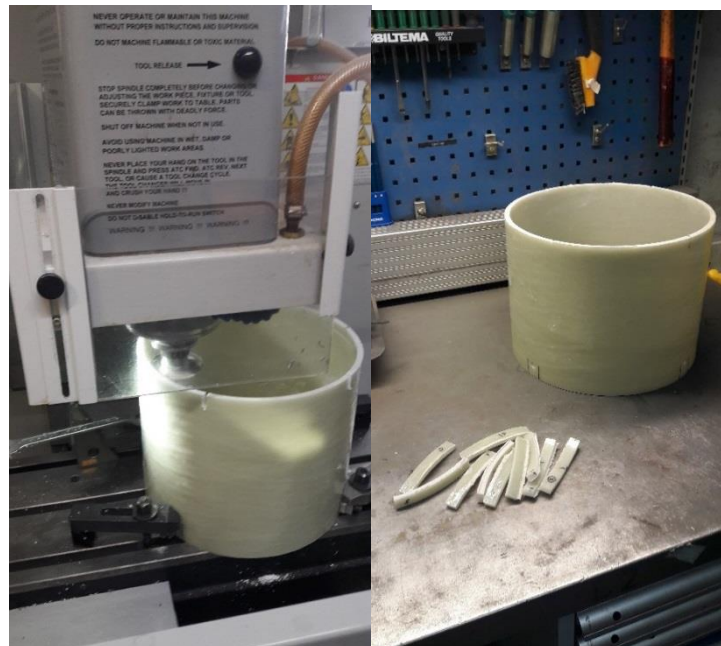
The 16 mm thick samples (to right) were milled with a slot mill in the HAAS milling machine (to left) at Arcada lab. (Tony Lallinaho)
